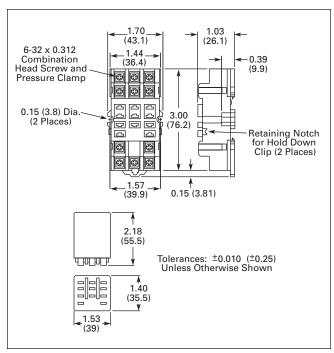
D5PA2 — Approximate Dimensions in Inches (mm)
